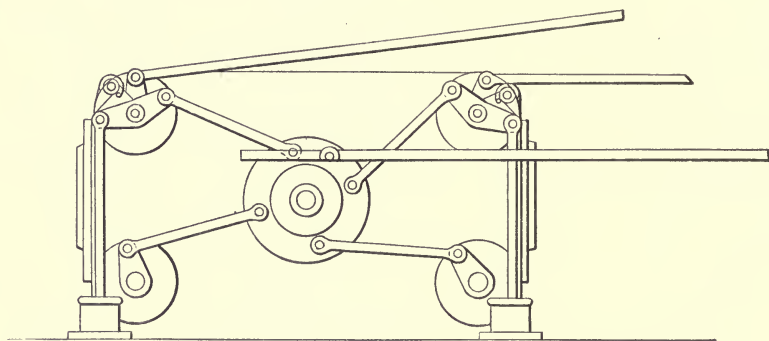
Corliss valve motion with wrist plate in extreme position.
